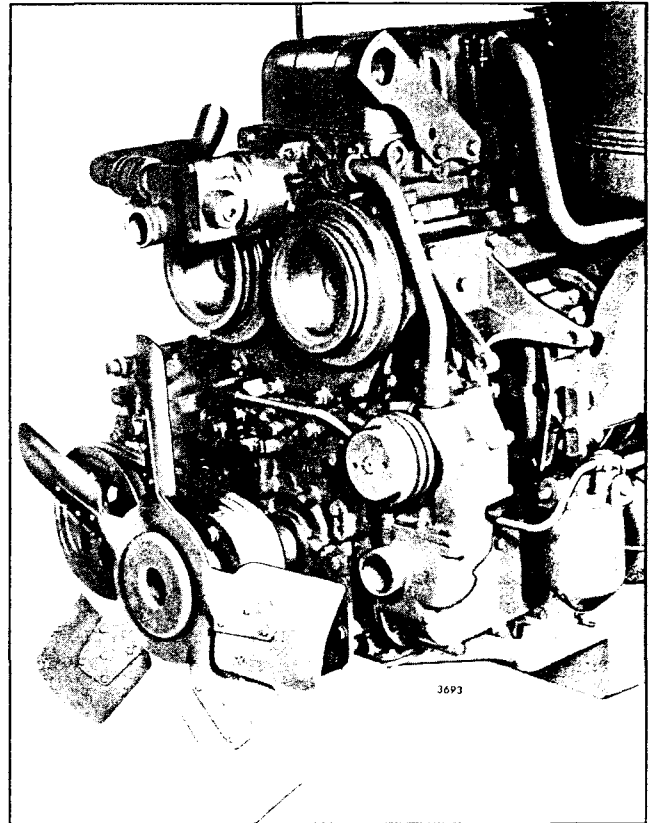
Crankshaft-Driven Fan Mounting (In-Line Engine)
